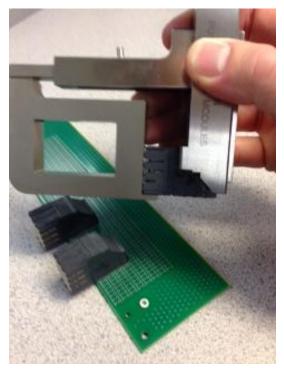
Paladin RAF Module Removal Tool with Push Body Attachment.
